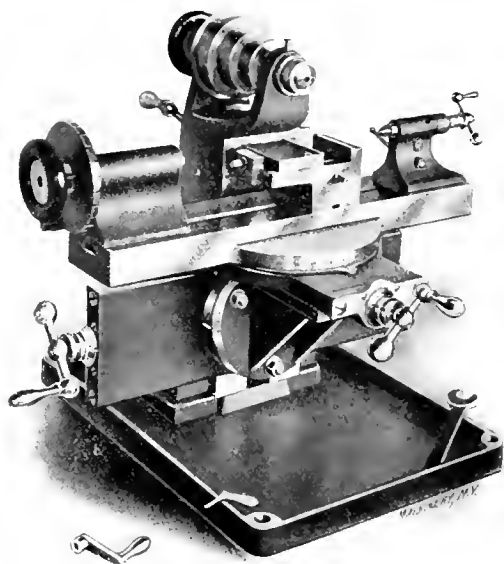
Large Size, Belt-driven, Reaming and Tapping Machine.
